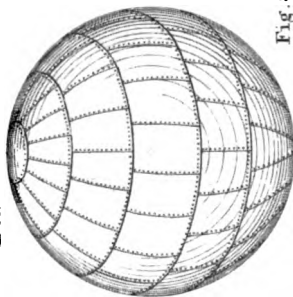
Boiler with spherical top and dished bottom. Diam. 12'0"
